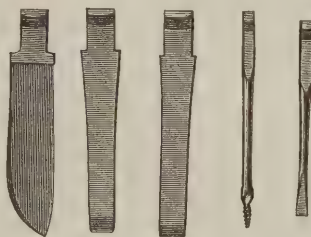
Tools Included in the New Pocket Tool Holder.
